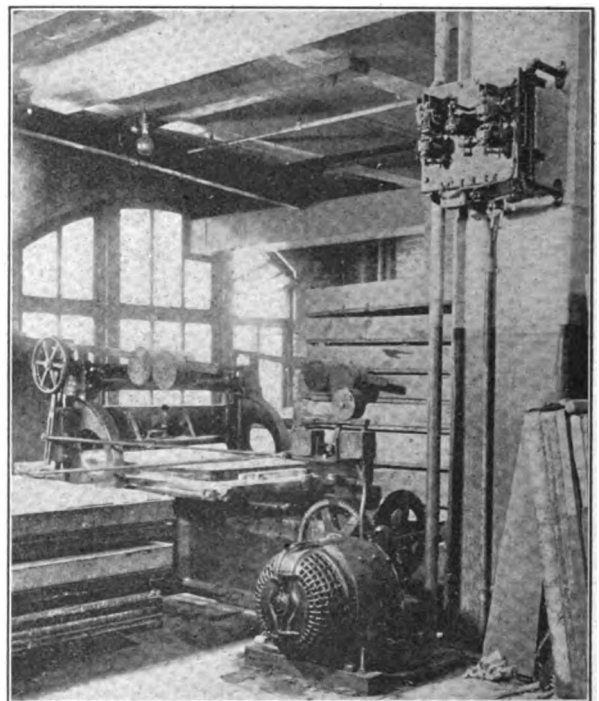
STONE-PLANING MACHINE EQUIPPED WITH DIRECT-GEARED MOTOR AND AUTOMATIC REVERSING CONTROLLER
